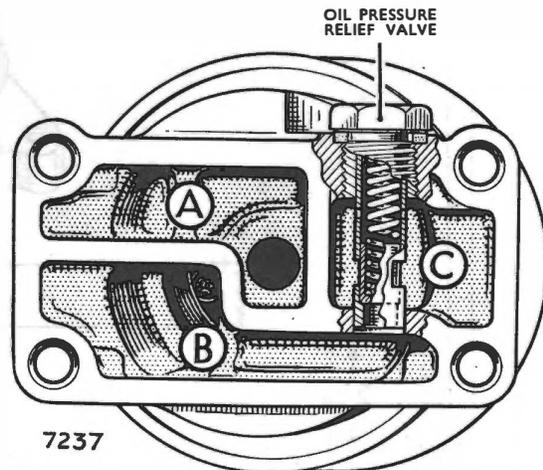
Throw away type full flow filter—oil pressure relief valve
